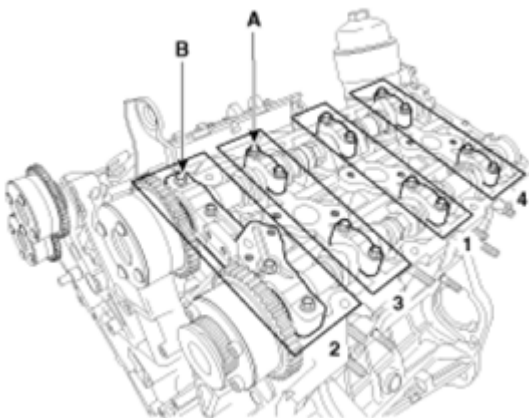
Identifying Camshaft Bearing Cap And Thrust Bearing Cap
